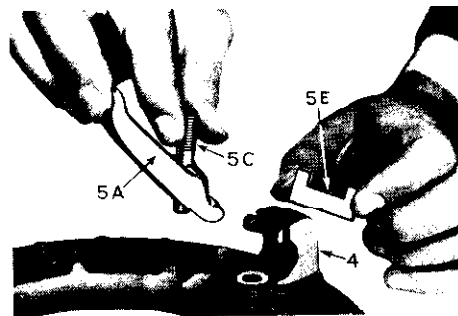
Illustration No. 31—Figure No. 5 Showing Disassembly of Clutch Fingers—J-20 Models
